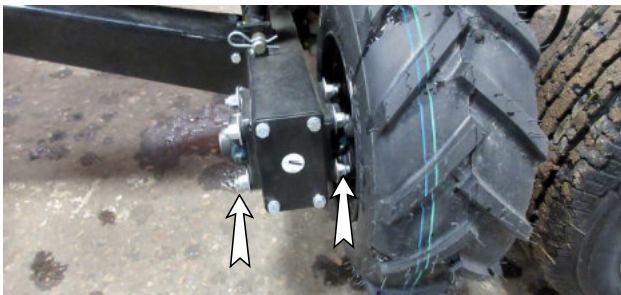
WHEEL ASSEMBLY CYLINDER ENDS BUSHINGS
